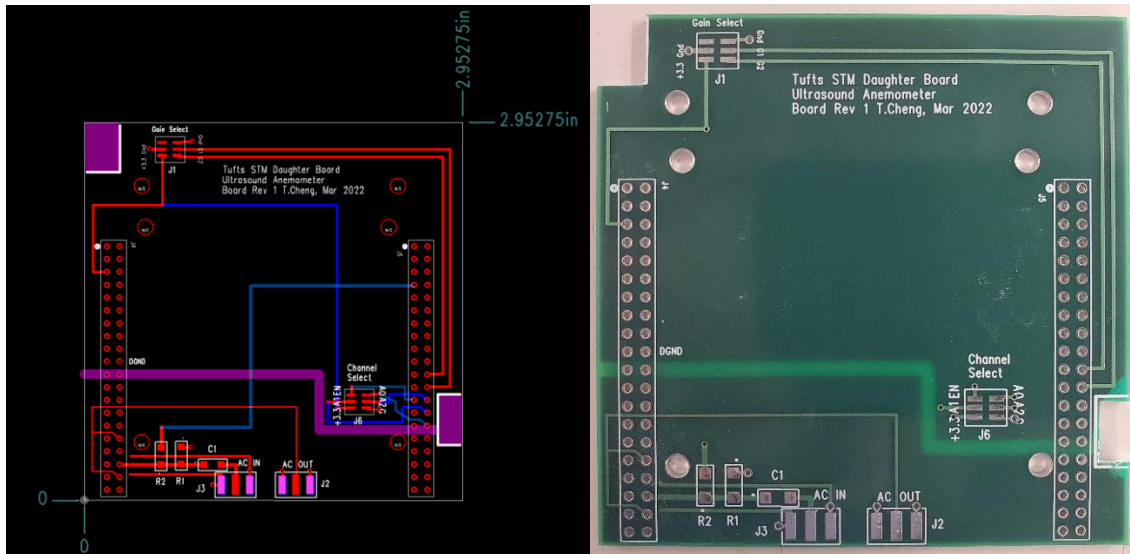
, PCB123 daughterboard layout (left) and photo of unpopulated PCB (right).
